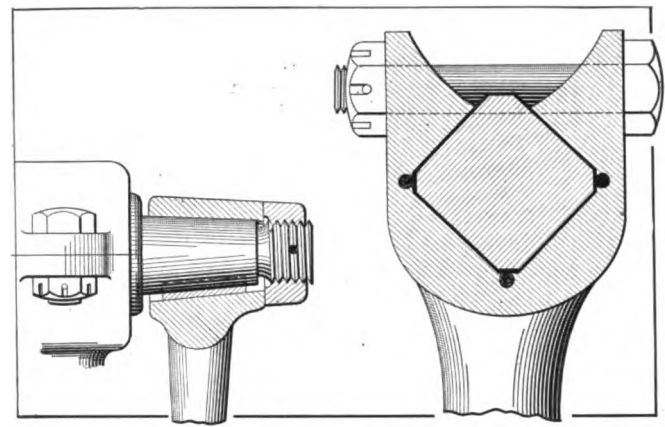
Square shaft with a broached hole in a clamping lever hub and a bolt with a lock nut for clamping purposes
